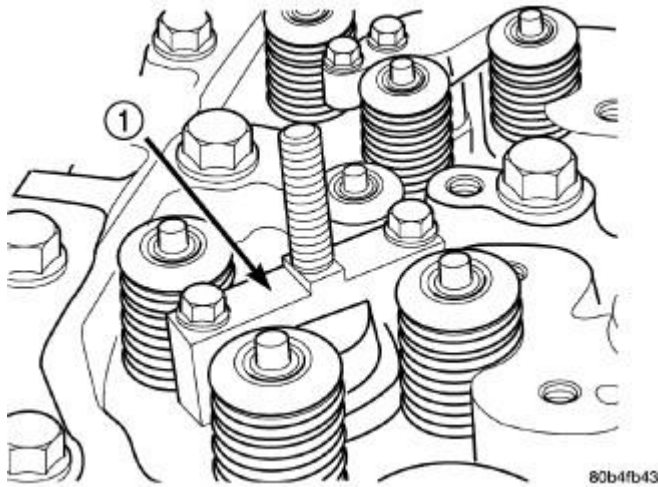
Spring Compressor Mounting Base-Part Of Tool 8319-A
